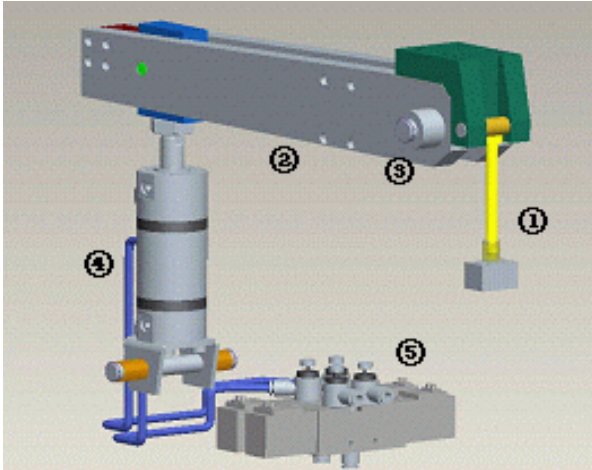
3D view of punching mechanism(punching parts lever lever pin pneumatic cylinder solenoid valve & speed controllers)
